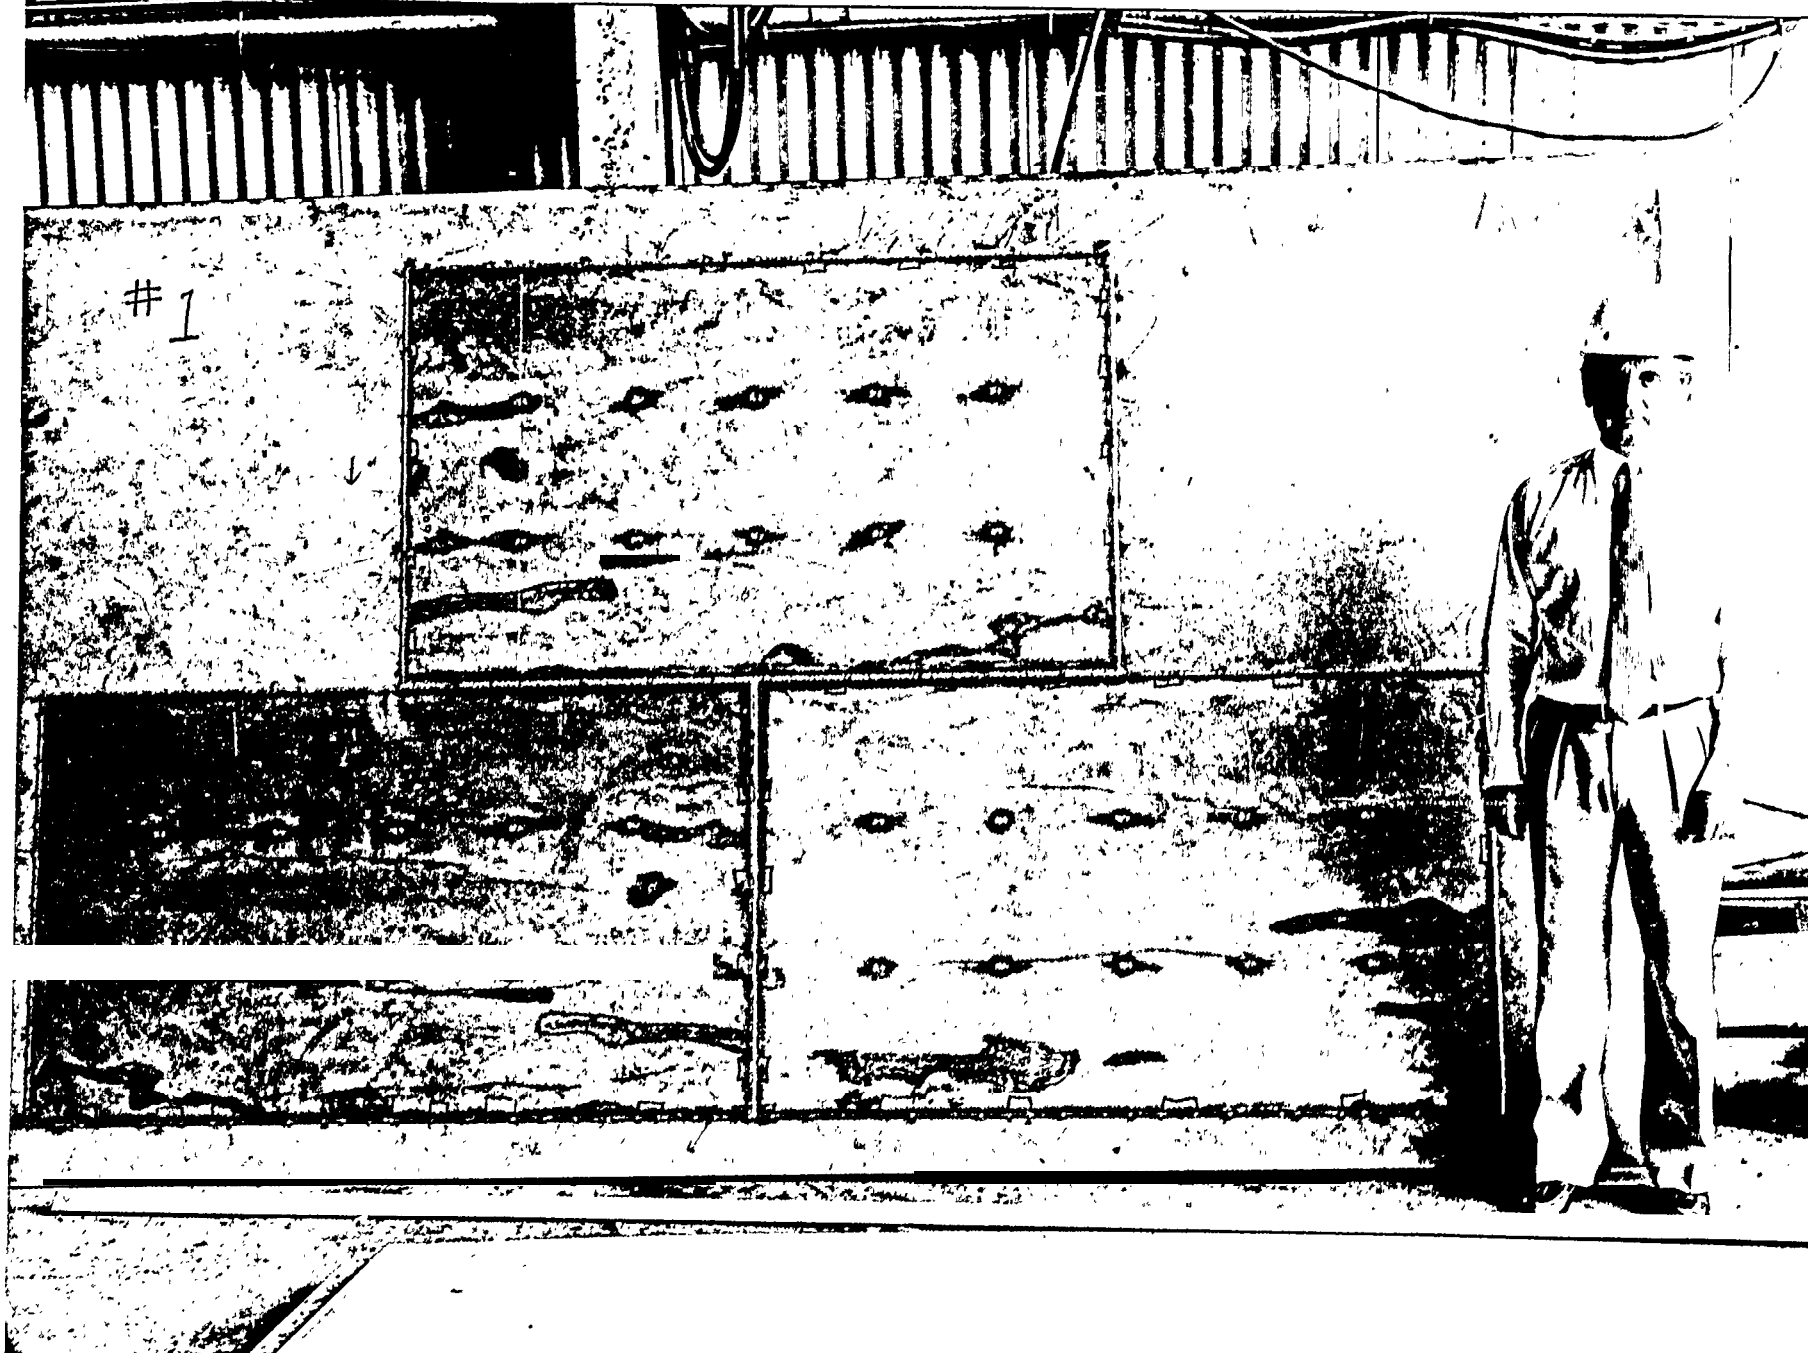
A photograph showing the relative size of a copper/nickel-steel composite ship hull material after completion of all the welds done in the flat position.
